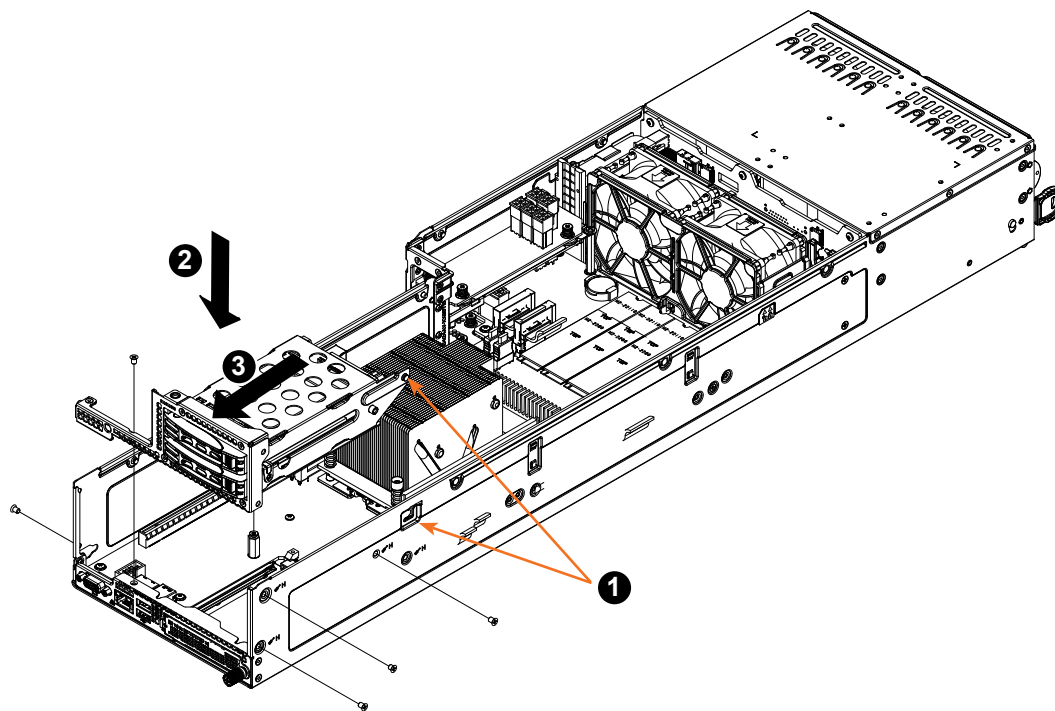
Installing Rear 2.5" Hard Drive Cage
